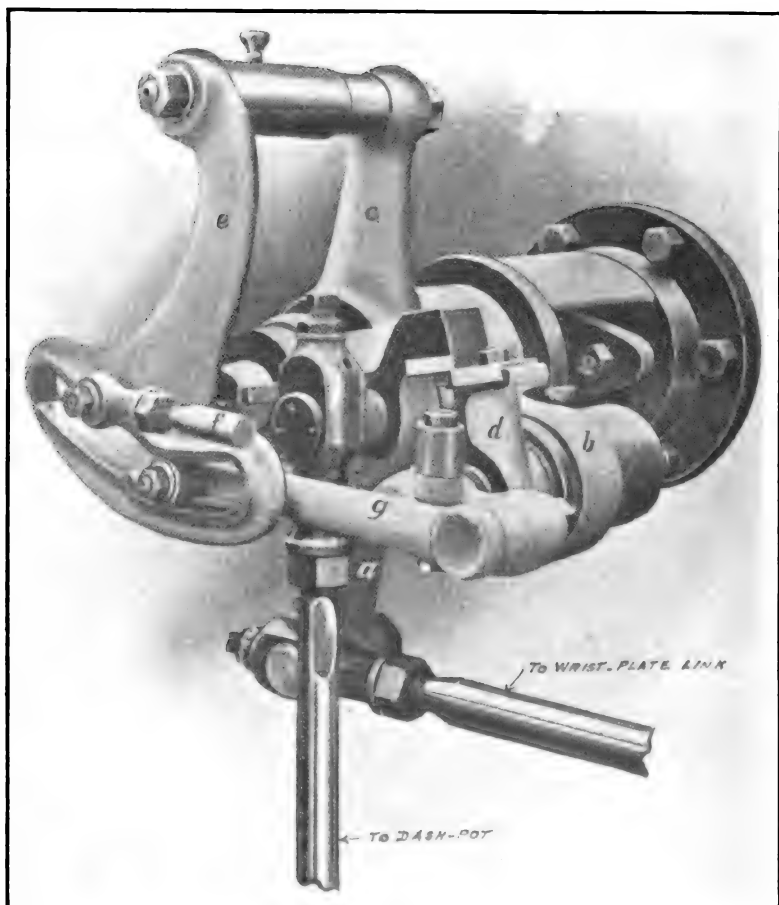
Detail of Valve Gear Shown in Fig. 111.
